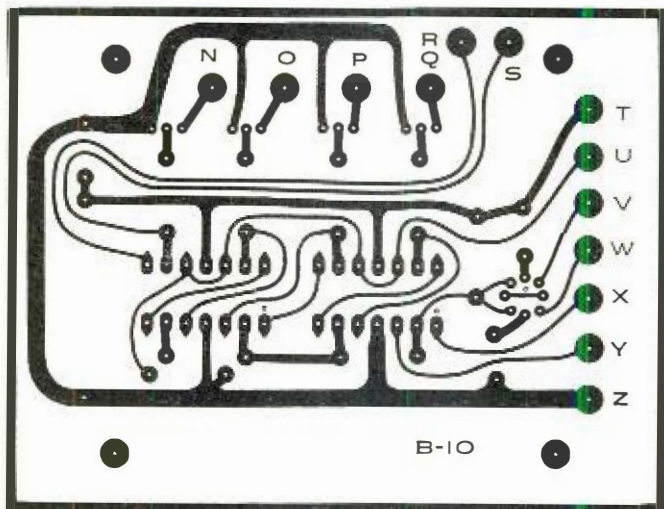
In actual size printed circuit board etching guide, lettered contacts indicate off-the-board component connections.
